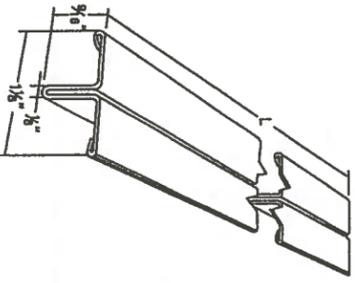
A-TWB (T-TYPE) BRACE DIMENSIONS
